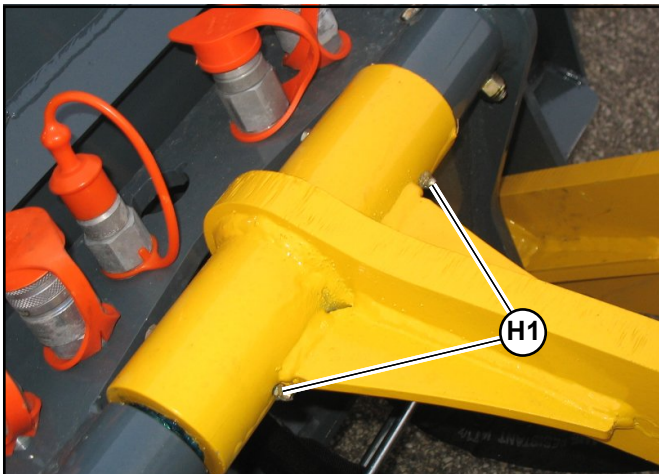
Lubrication - Non-Telescopic Machines
